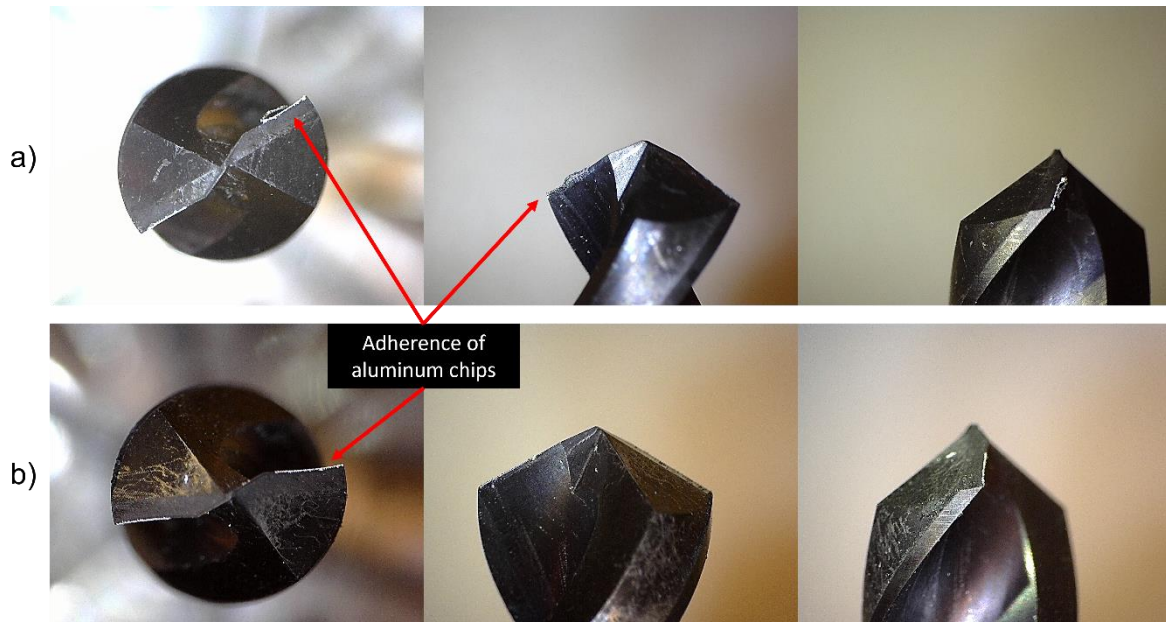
Wear analysis of the cutting edges of the drilling tool 2 after drilling: (a) 15 holes and (b) 345 holes (feed – 0.2 mm/rev; cutting speed – 150 m/min) in the configuration type II.
